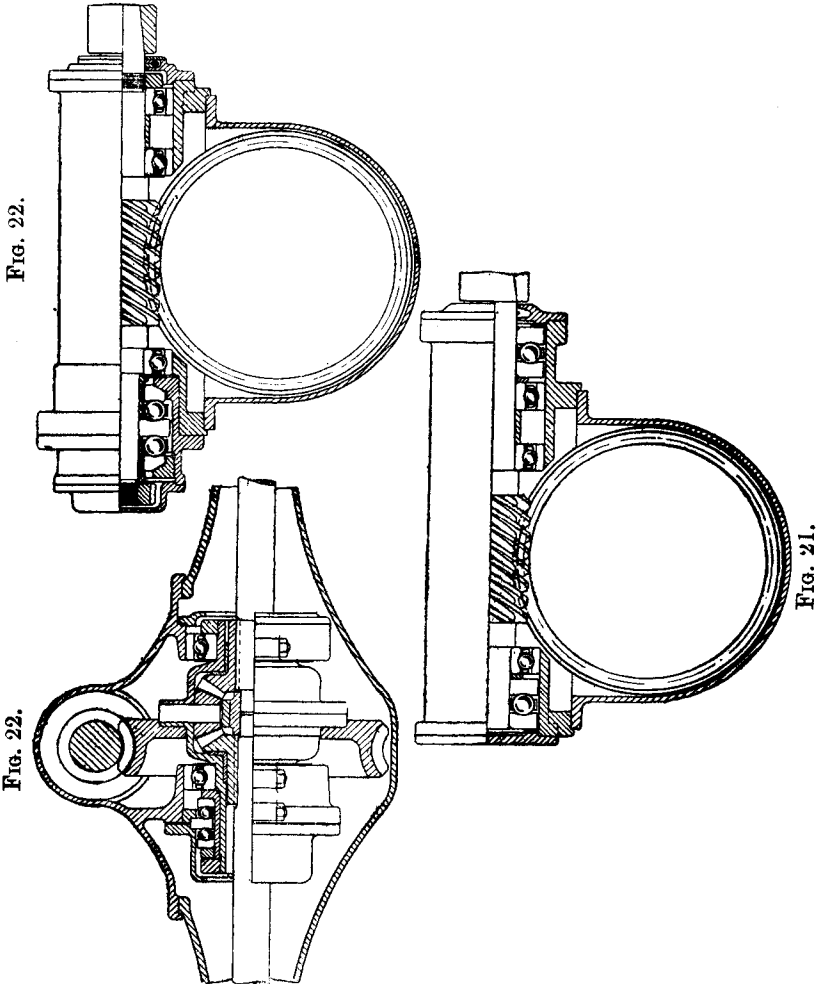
shows this worm gear mounted with the double thrust bearing as recommended. The adjustment is made independently and can be locked permanently in its correct position. This bear-
